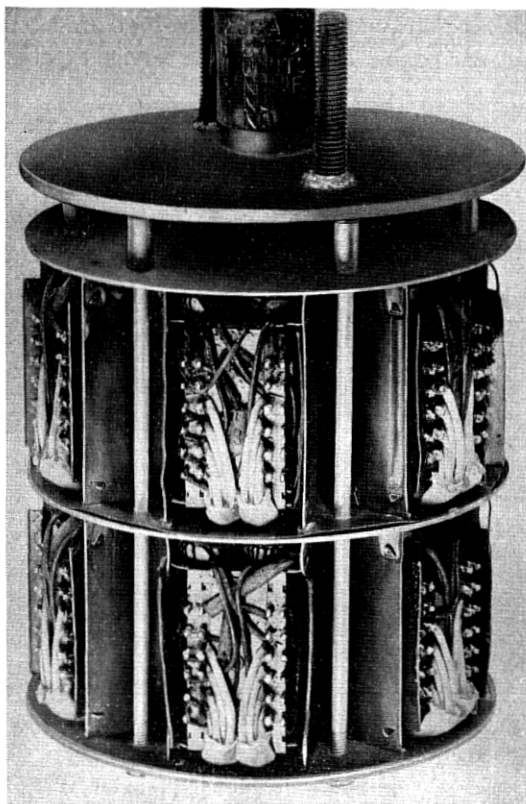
Potting assembly methods—medium and large size complements of MF-type units. For placement in cylindrical, thin steel, casings.
